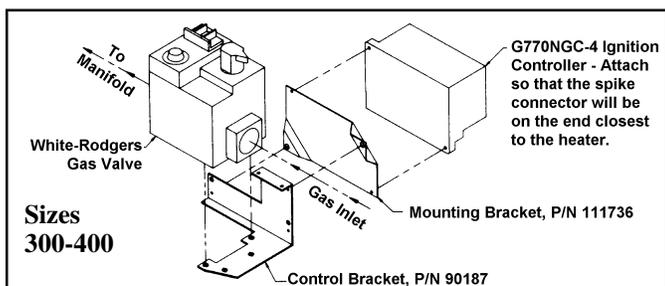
Assemble Ignition Controller and Bracket; Attach to the already-installed White-Rodgers Gas Valve
